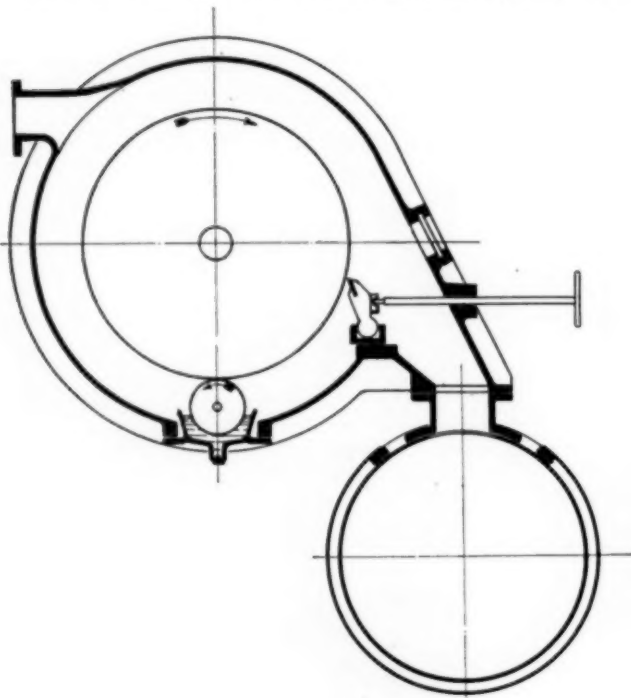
PASSBURG SINGLE VACUUM DRUM DRYER WITH ROLLER FEED EQUIPMENT.
